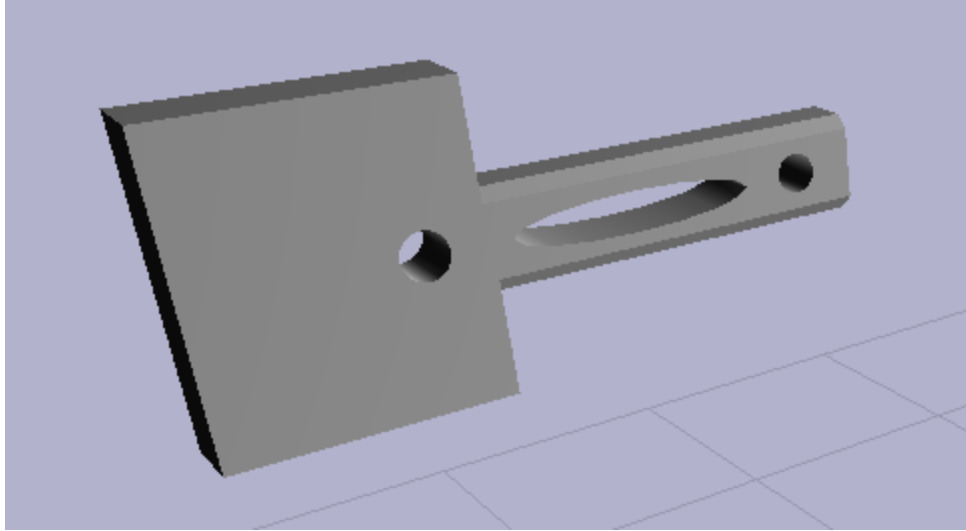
Design Concept 2 – Connecting Rod Made in VR Utilizing a Single Large Hole for Mass Reduction
